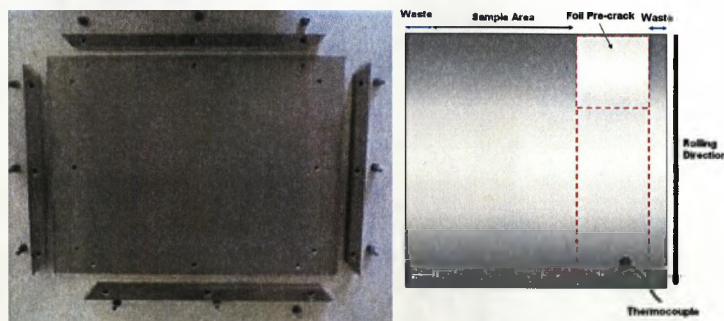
a) Picture frame type mould used for producing FMLs and b) plan view of lay-up
